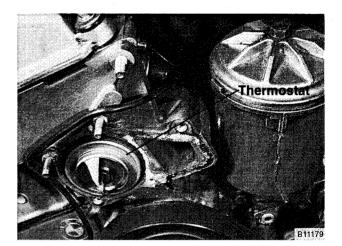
Thermostat housing shown removed (6-cylinder engine).
